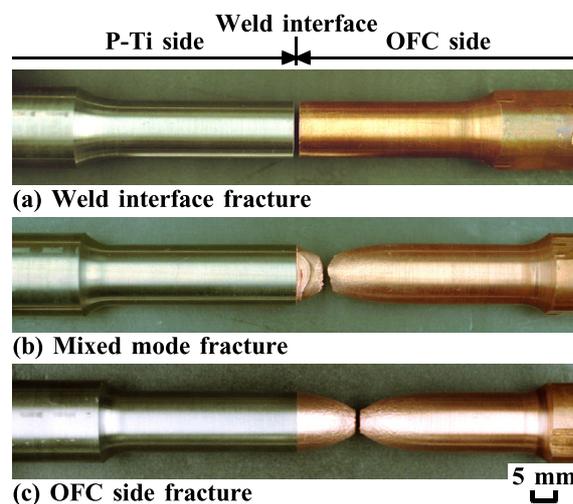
Example of appearances of joint tensile test specimens after tensile testing.
